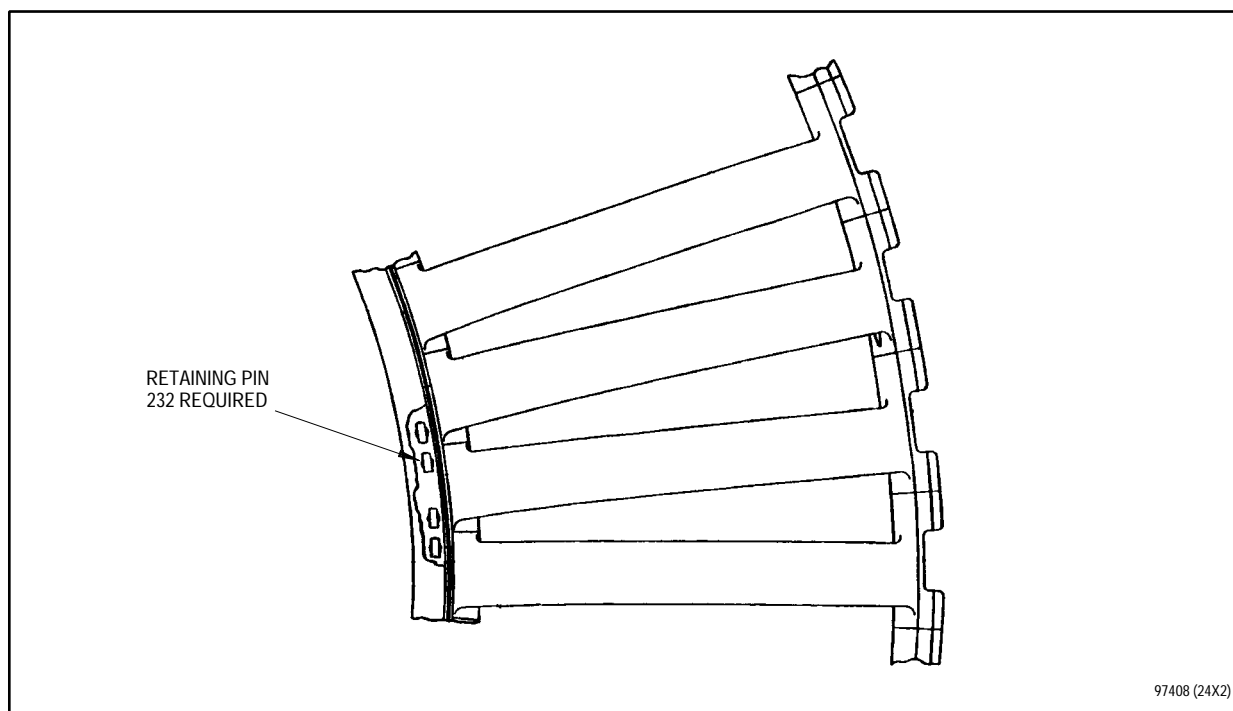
Second Stage Compressor Stator Assembly - Stator Vane Retaining Pin Position
